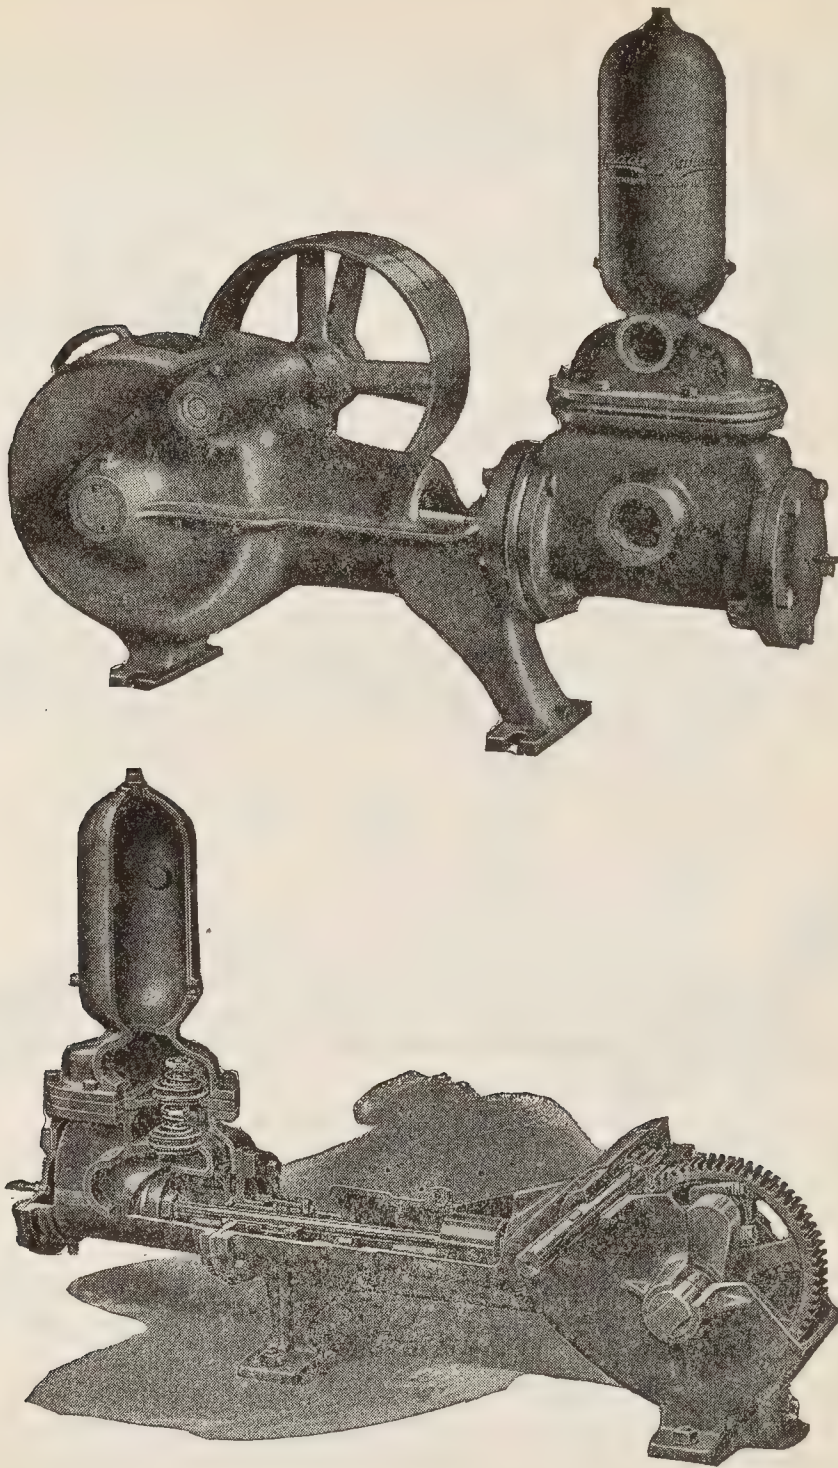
,808.—Leader-Trahern geared deep well power pump belted to electric motor; sectional view showing gears and oil bath.
